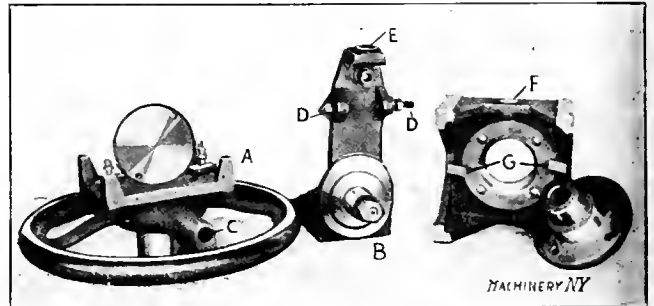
Jigs for Drilling Parts of Device shown in Fig. 5
